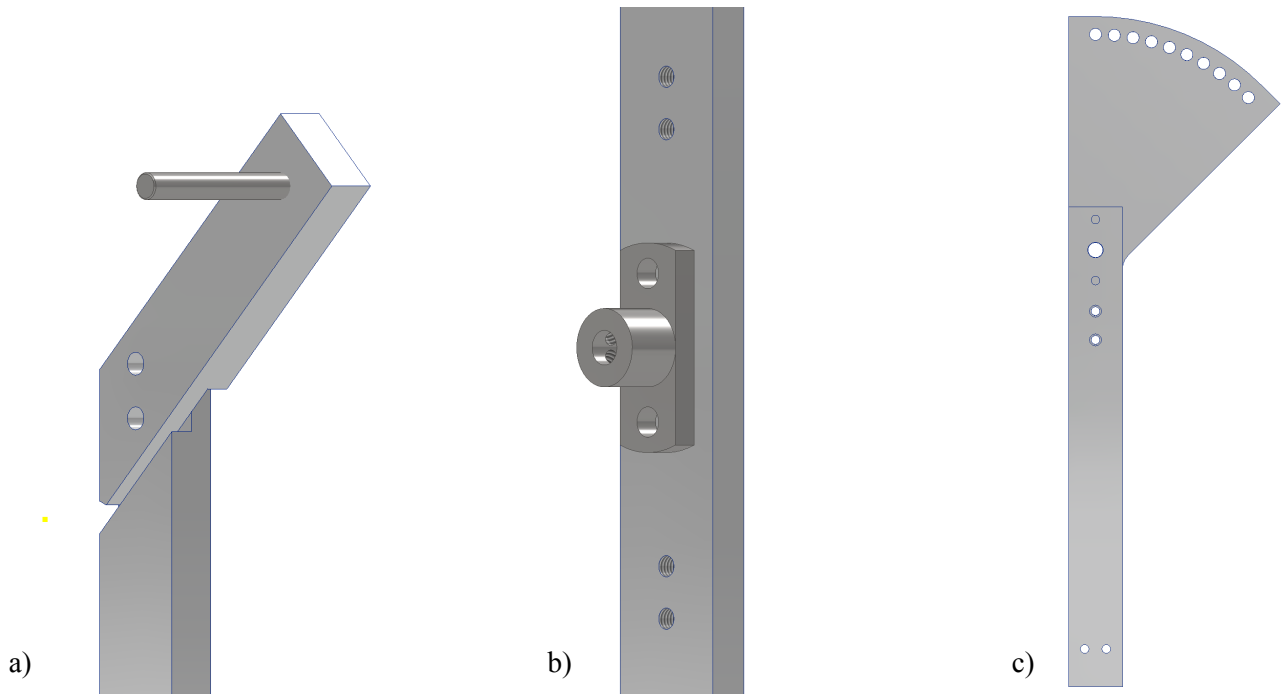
Shaft attached to back support (a), shaft collar to support rotation (b), and angle controlling fixture attached to the front support (c).
